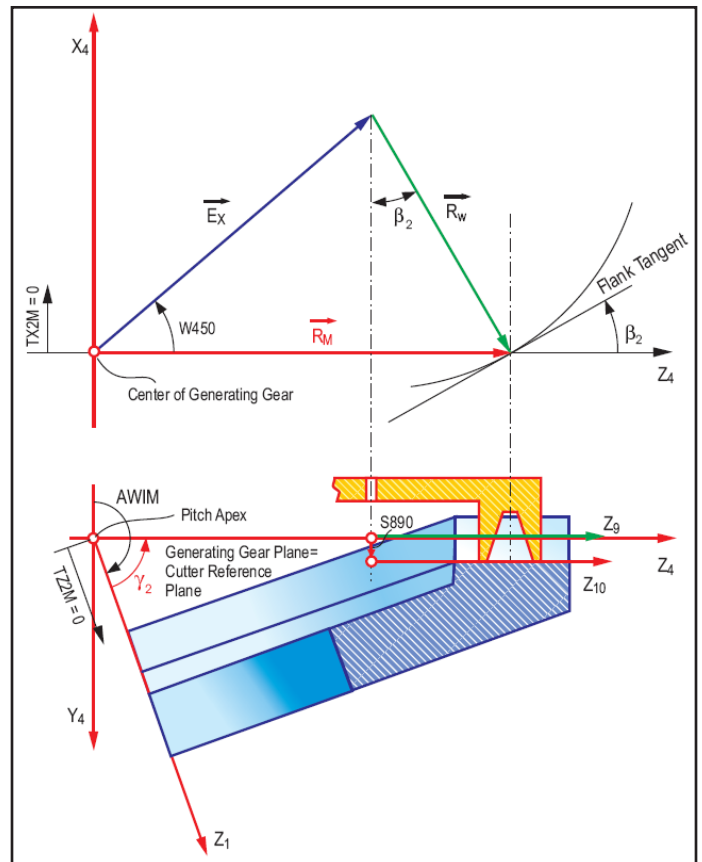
Ring gear, basic machine model: upper graphic — front view; lower graphic — top view.
